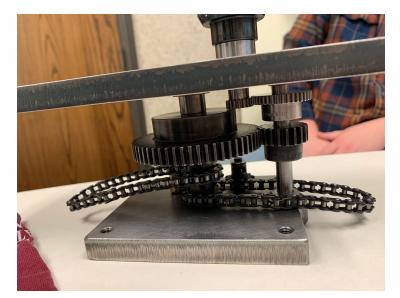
Full Gearbox Assembly with Top Mounting Plate
